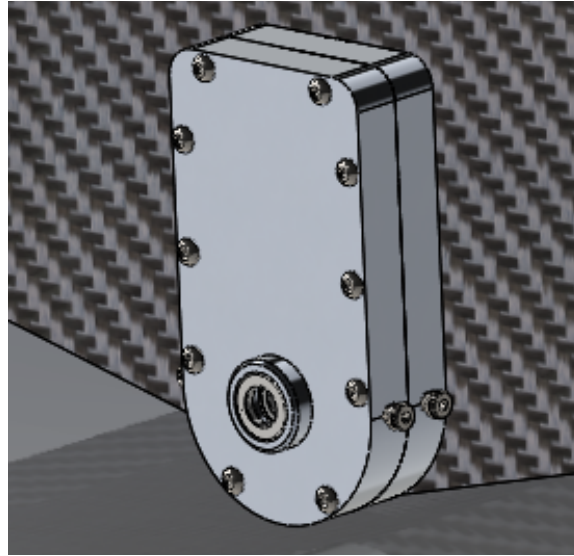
CAD rendition of the drop-down gearbox unit in Solidworks.
